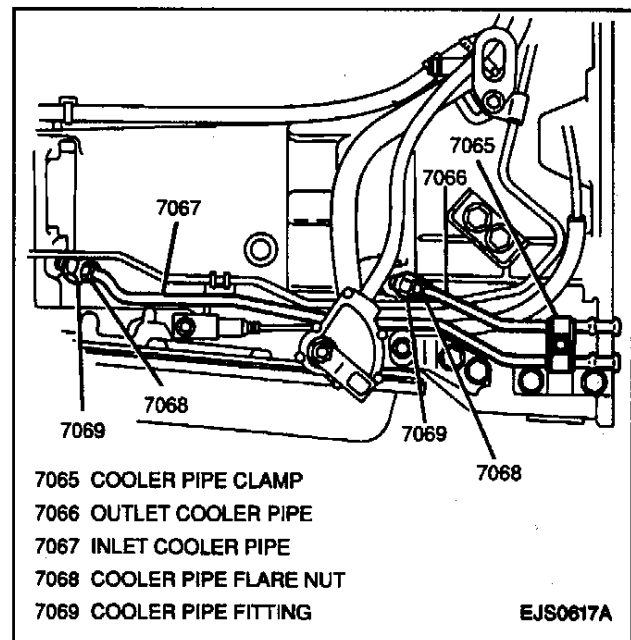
Transmission Cooler Pipes (3L30, 3-Speed)
